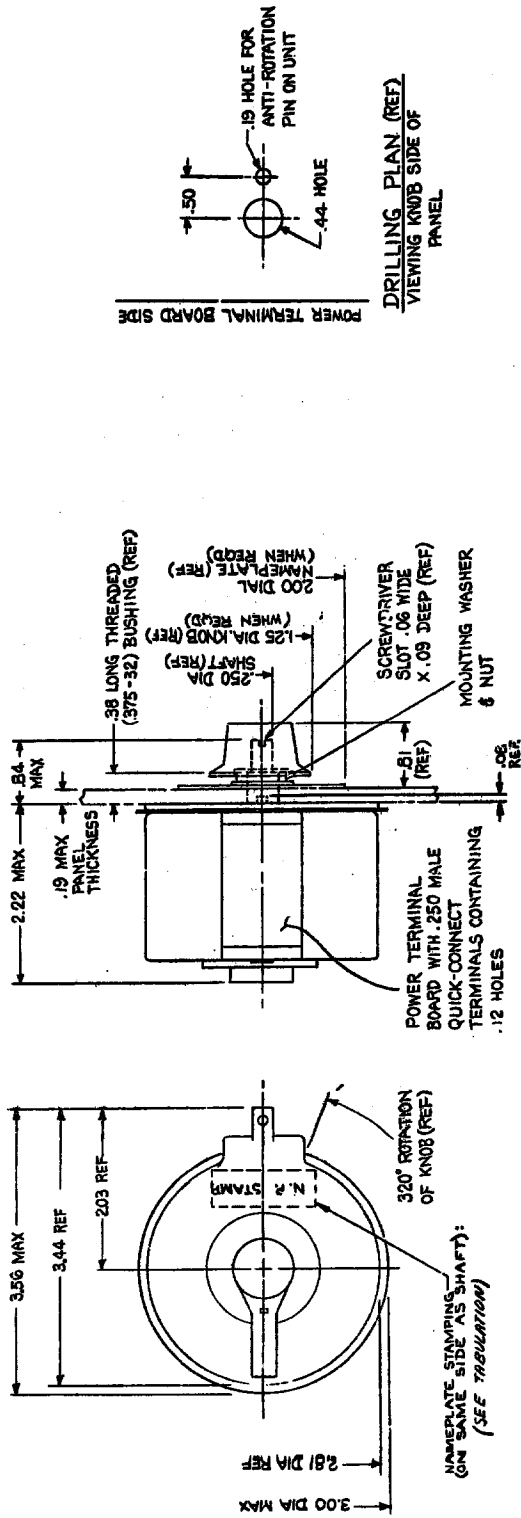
(467A716AA-7) Outline of Test Transformer (9T58B2909)
